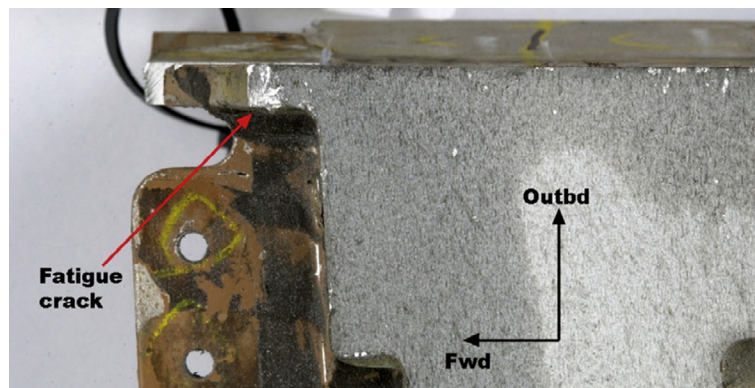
A view of Y488 bulkhead's RHS outboard flange and adjoining web in an aircraft. The location of the fatigue crack in the forward flange is highlighted [53].
